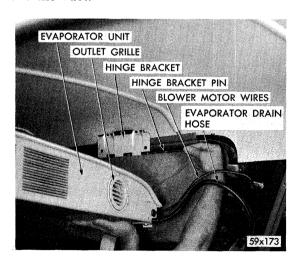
Removing or Installing Air Conditioning (Roof Unit)
